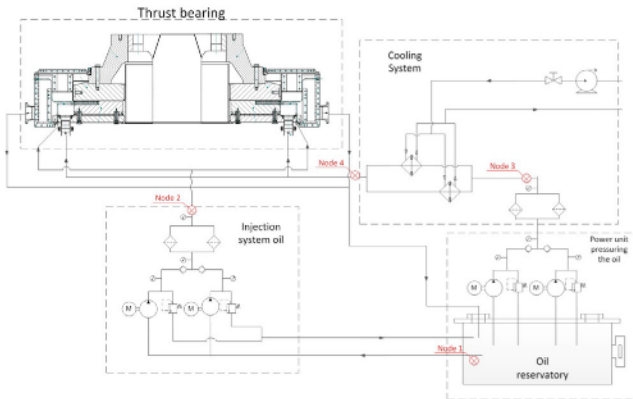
Lubricating and cooling systems of hydraulic turbine thrust bearing
